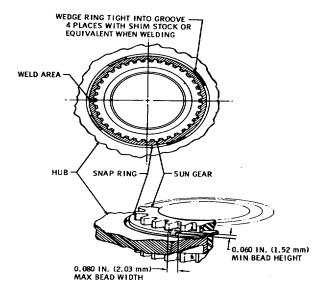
Welding Instructions for Splitter Sun Gear Assembly
